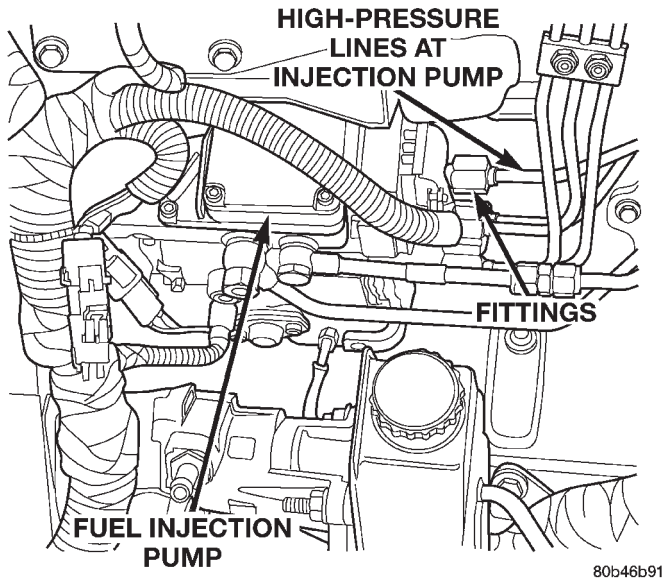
High-Pressure Lines at Fuel Injection Pump
